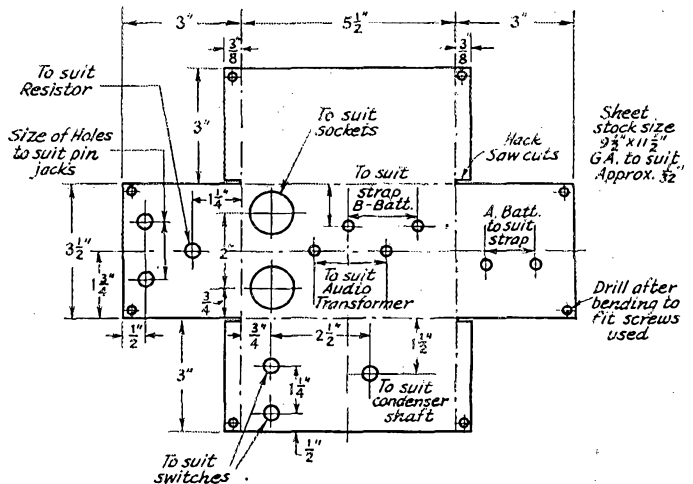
Sketch showing "Tiny Tim's" chassis lay-out and dimensions. The chassis is cut from light aluminum sheet.
